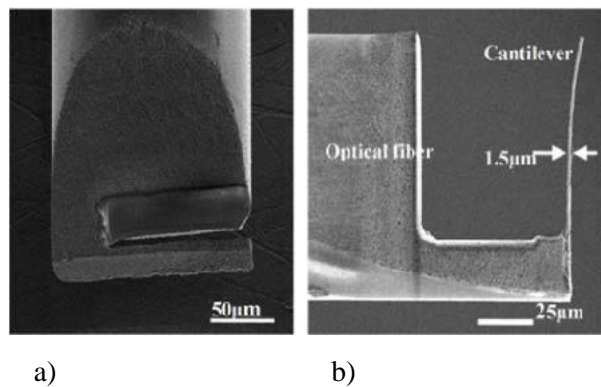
Cantilever obtained a) after the laser machining and b) after the FIB machining [139].
